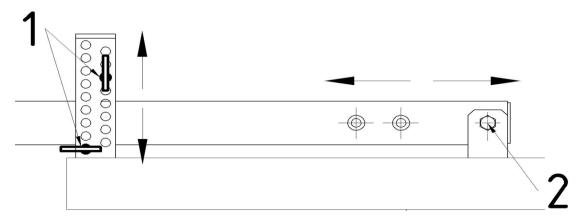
Adjustment of the depth and distance of the roller: 1 - depth adjustment pins with a stabilizing plate; 2 - roller arm fixing screw.
